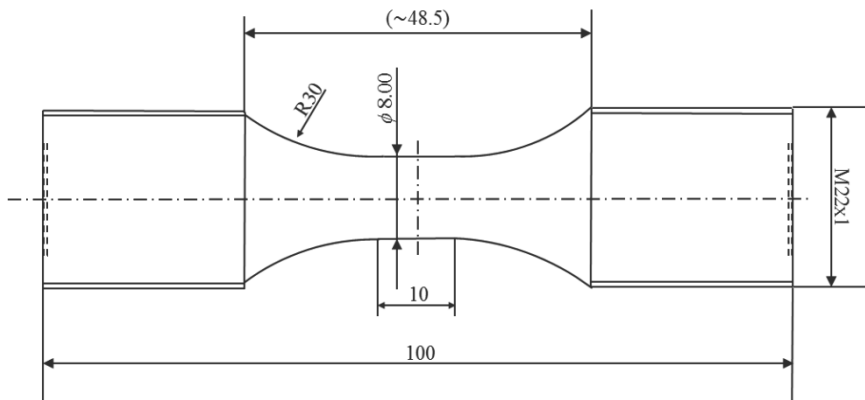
The dimensions of the test bar for the quenched and tempered 34CrNiMo6 (A&B) steel used for axial fatigue testing.
